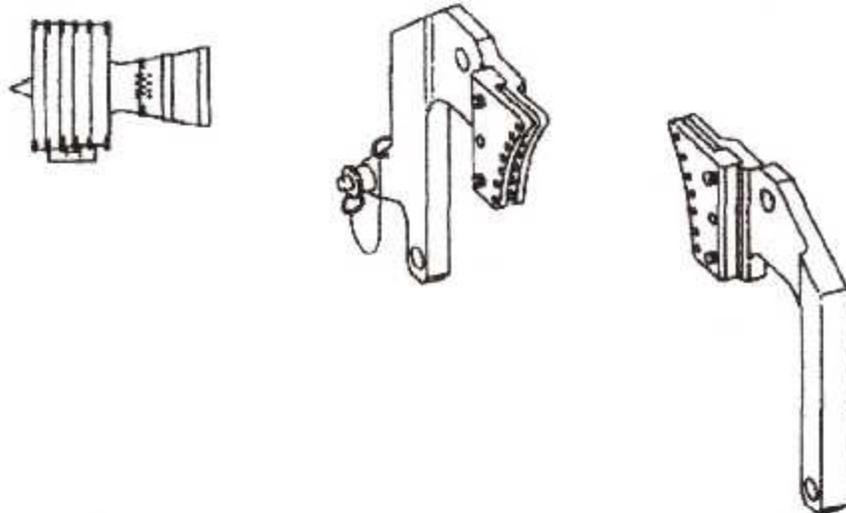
Bracket Set (Ferrures d'Assemblage), 856A1491G02
